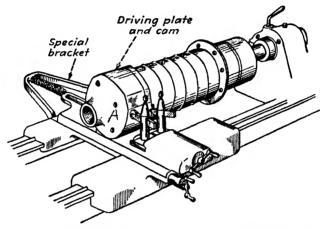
Forming the same job on a lathe by using a guide cam.
